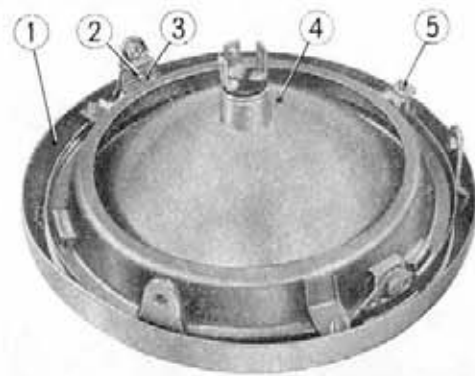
① Headlight rim ② Cotter pin ③ Headlight beam unit screw ④ Headlight beam unit ⑤ Adjusting screw
